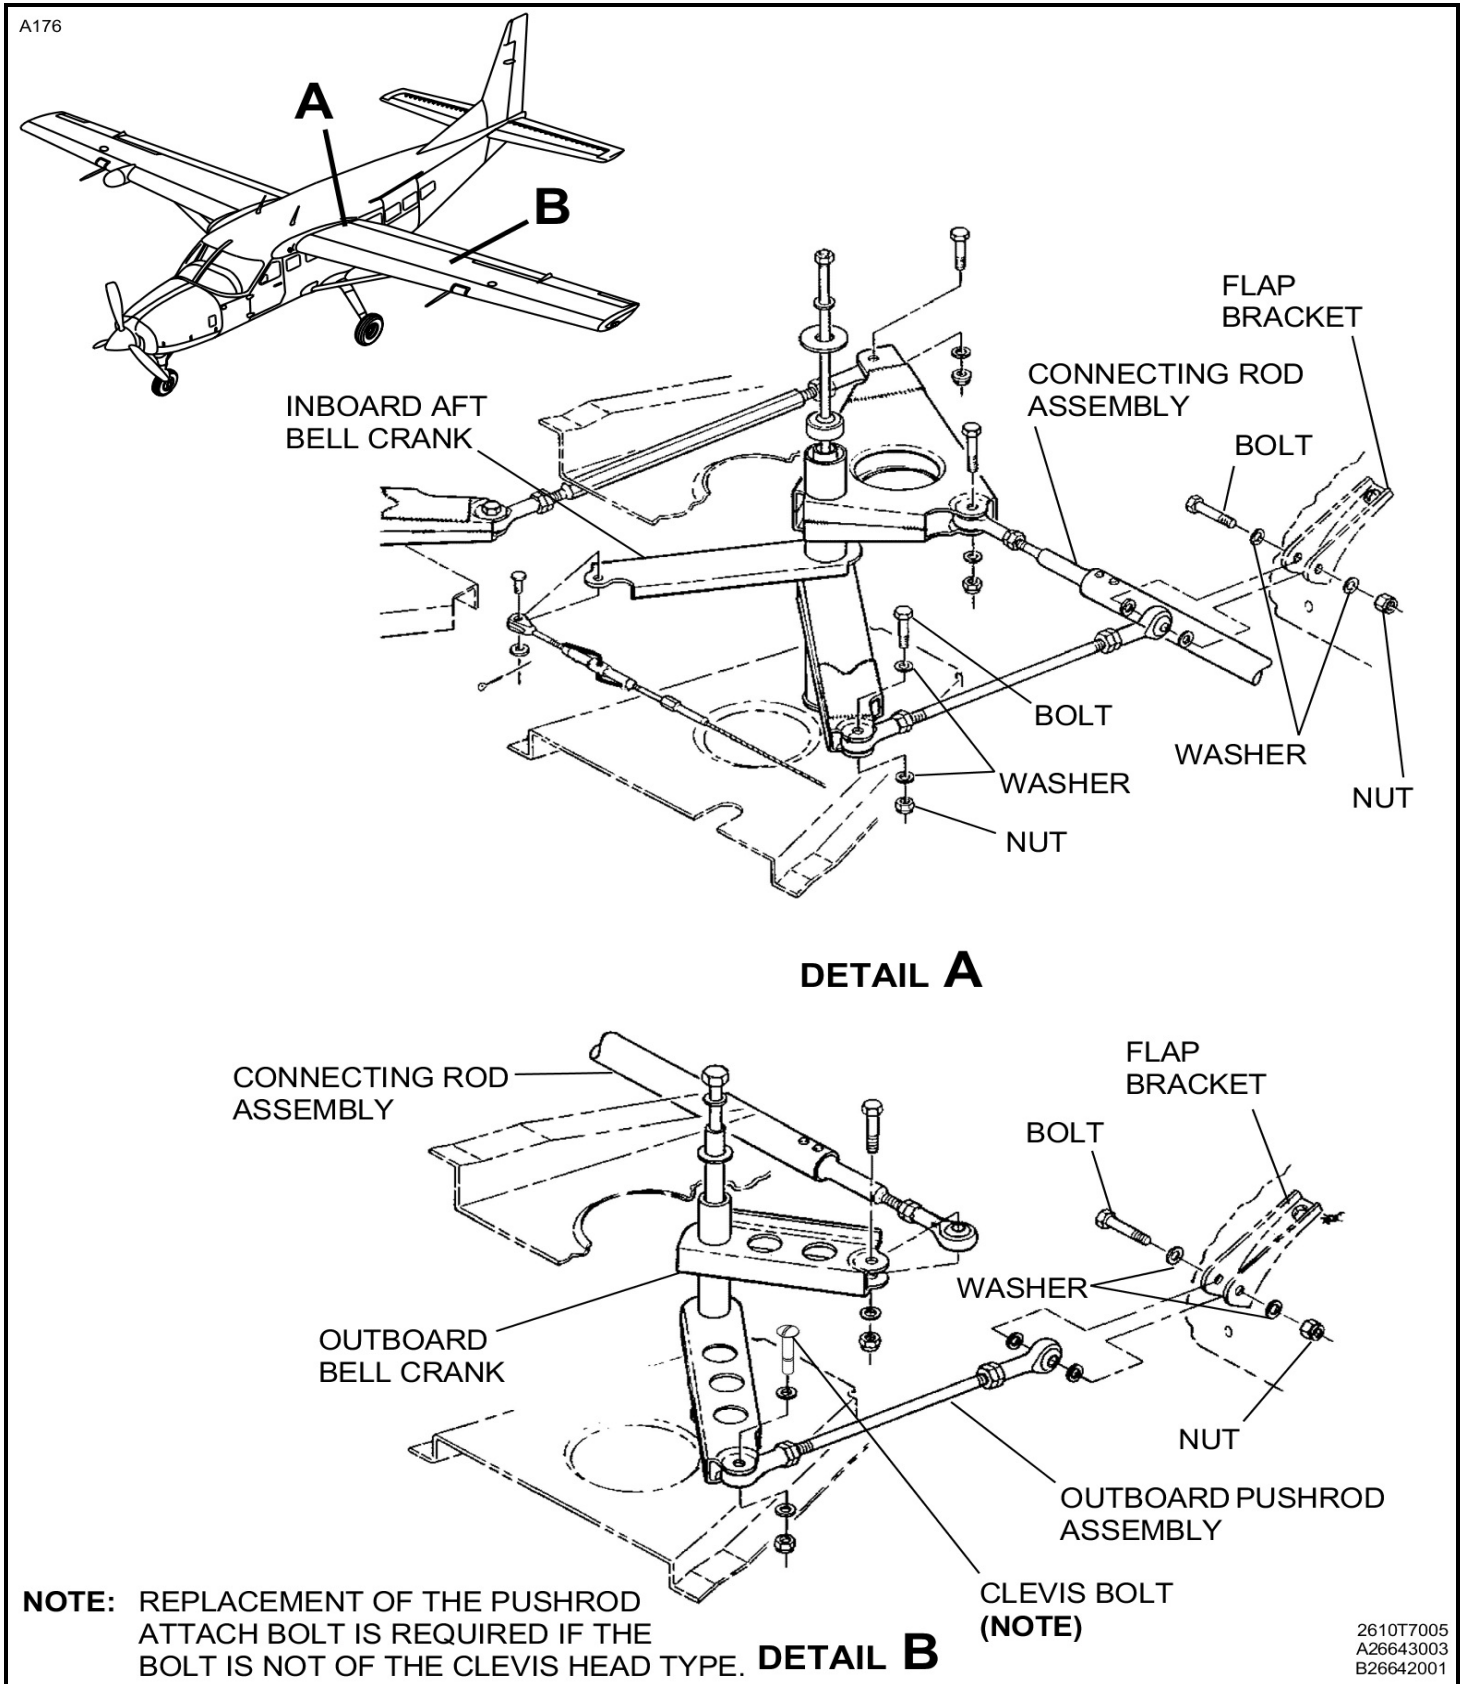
Sheet 1 : Flap Cables and Pulleys
